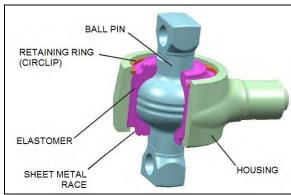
BALL PIN JOINT CONSTRUCTION
